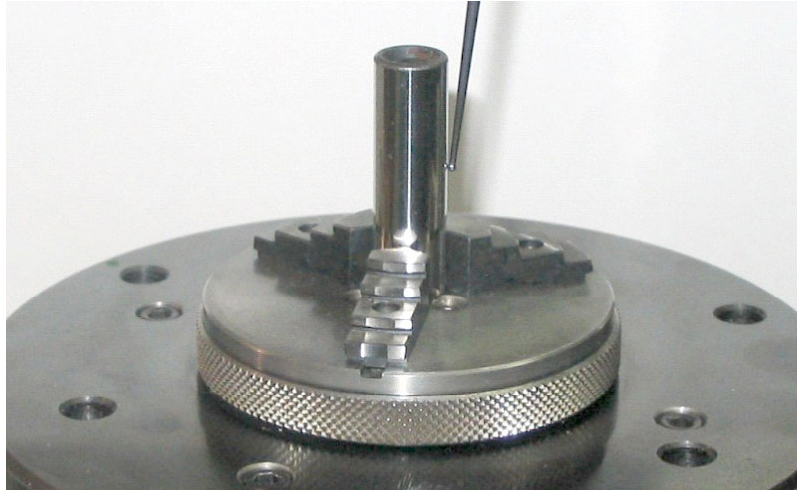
Three-Jaw Precision Chuck for Measurement Machine
